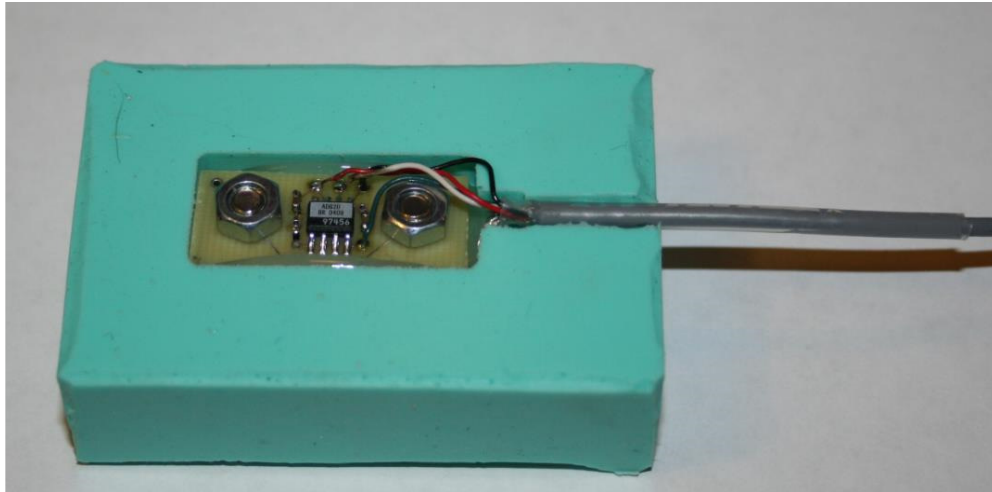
14. Placing the PCB into the mold and pouring the epoxy
